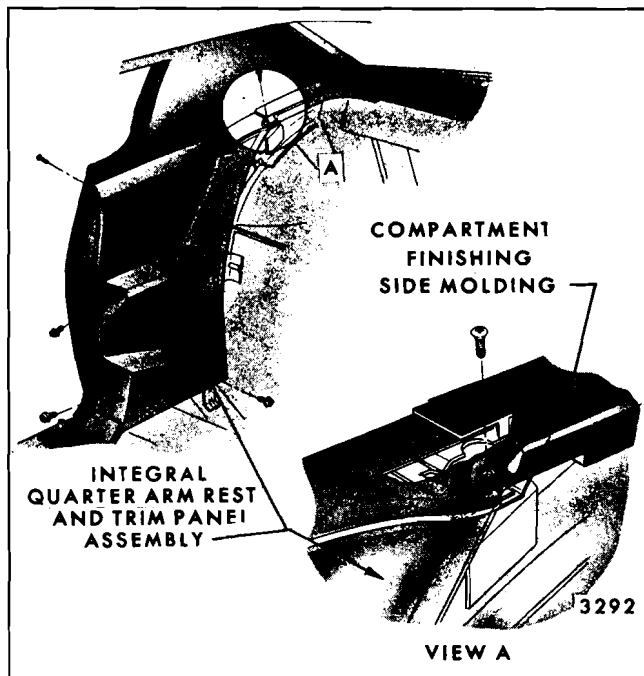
Integral Rear Quarter Arm Rest and Trim Assembly - "69347" Style
